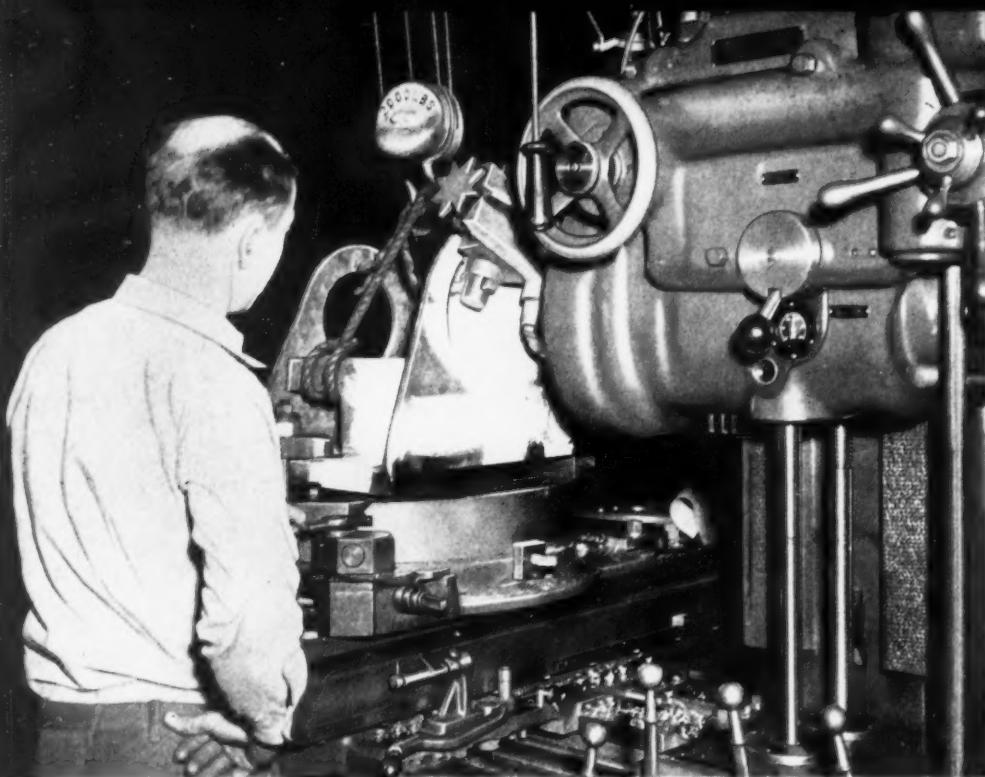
Applying a Horizontal Boring, Drilling, and Milling Machine for Drilling Holes in Two Extensions of a Welded Steel Bracket
